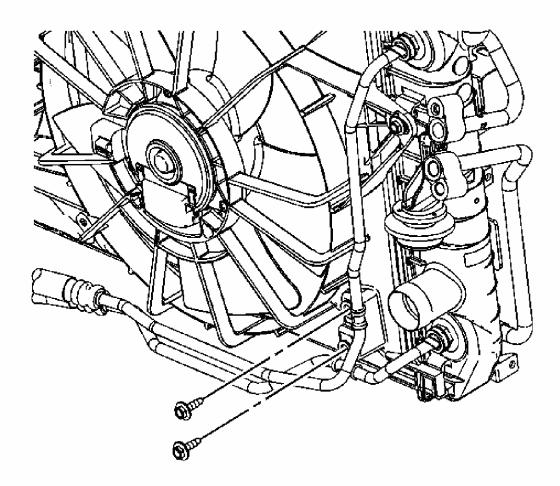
Identifying Transmission Oil Cooler Pipe Retaining Bolts Courtesy of GENERAL MOTORS CORP.
